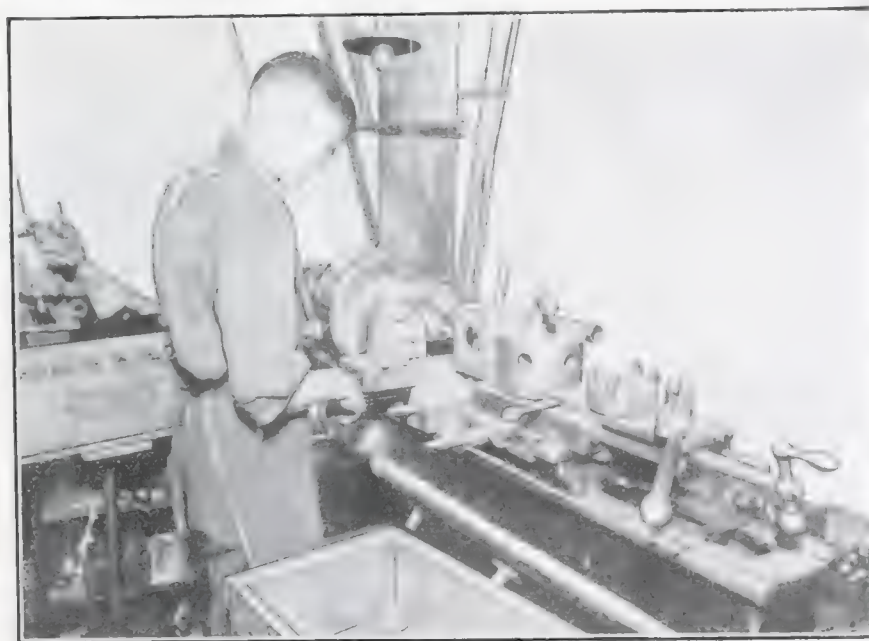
FINISHING FUSE SOCKETS ON A "WARNER & SWASEY" TURRET LATHE
